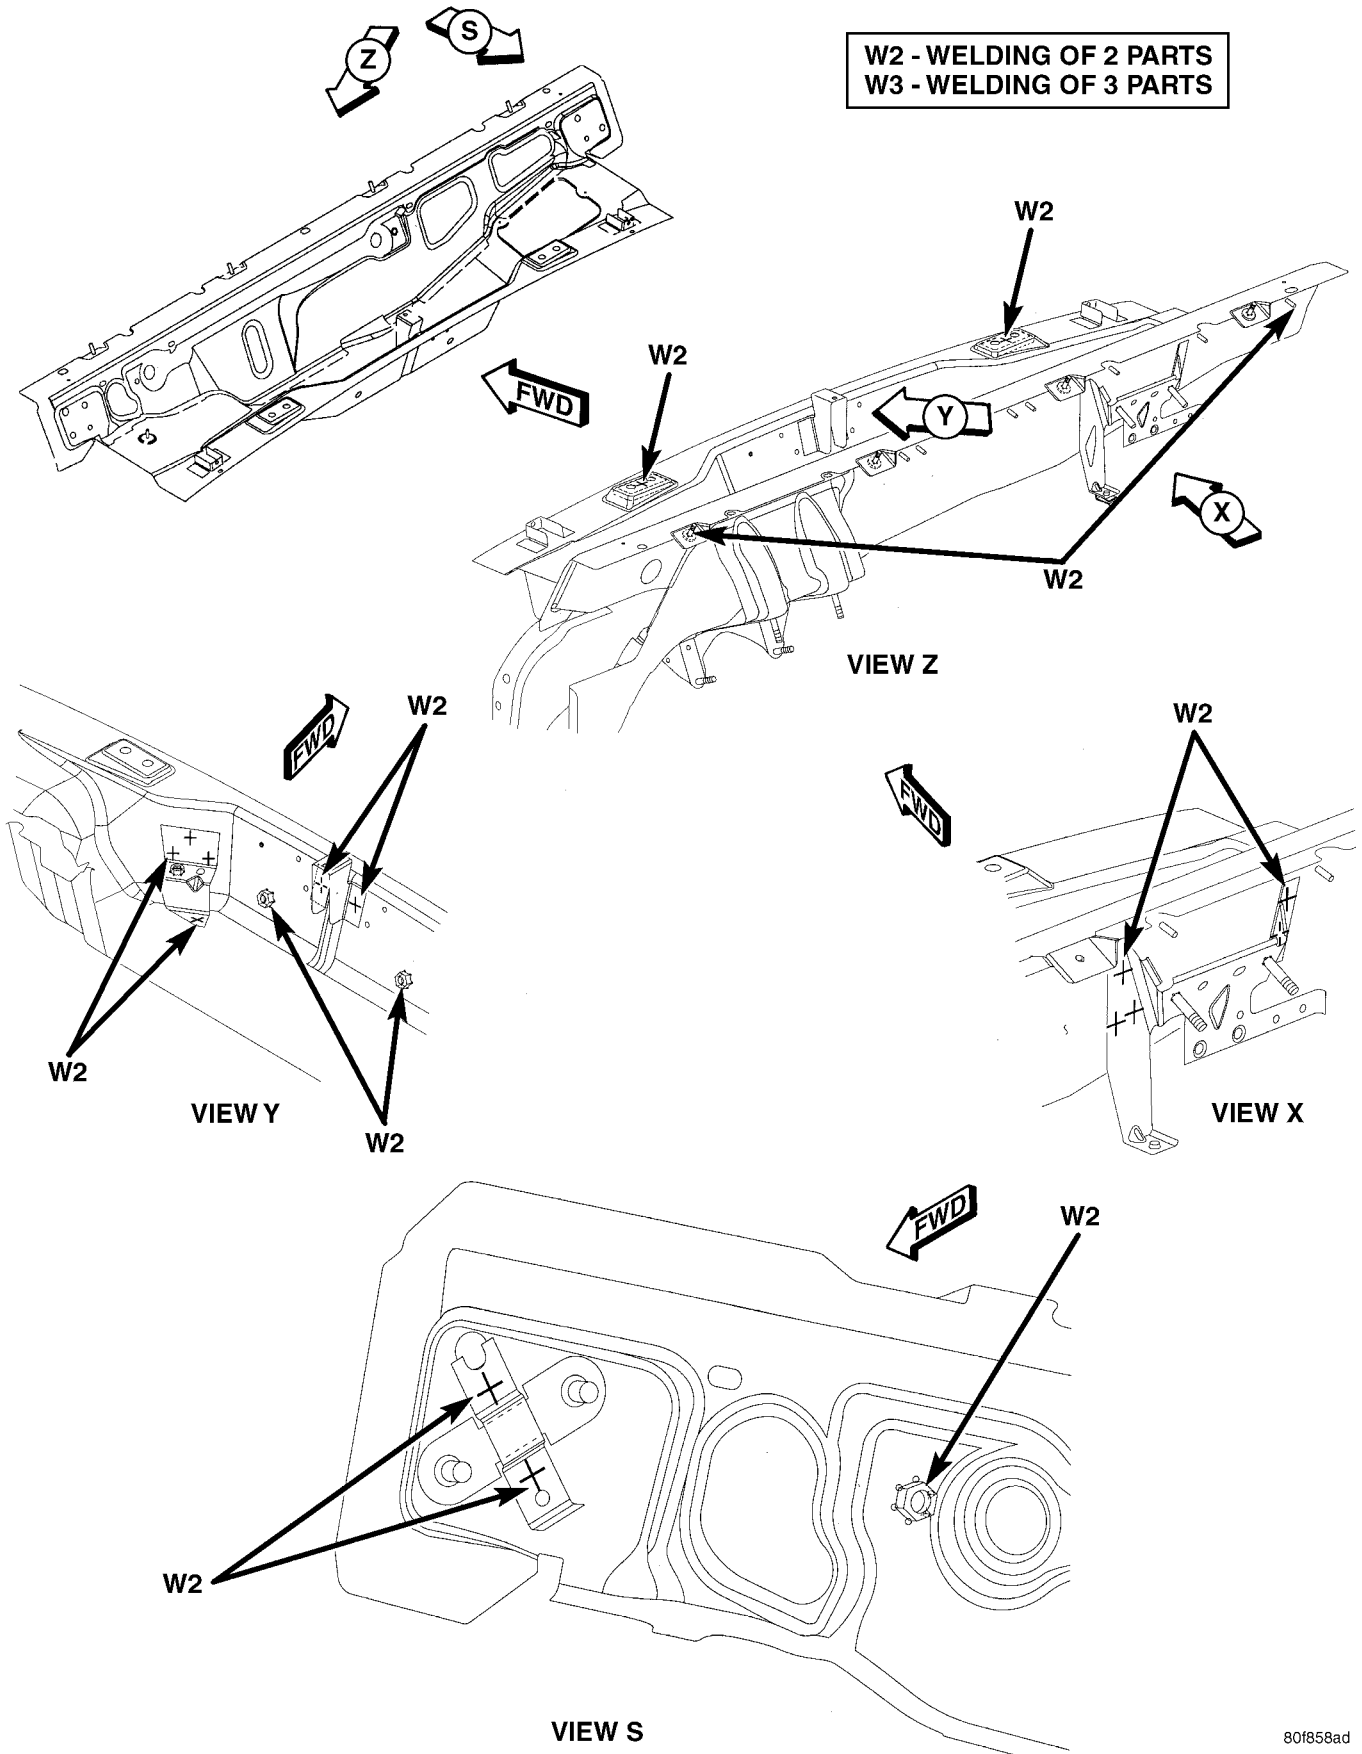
COWL ASSEMBLY - LEFT HAND DRIVE (2 OF 3)
